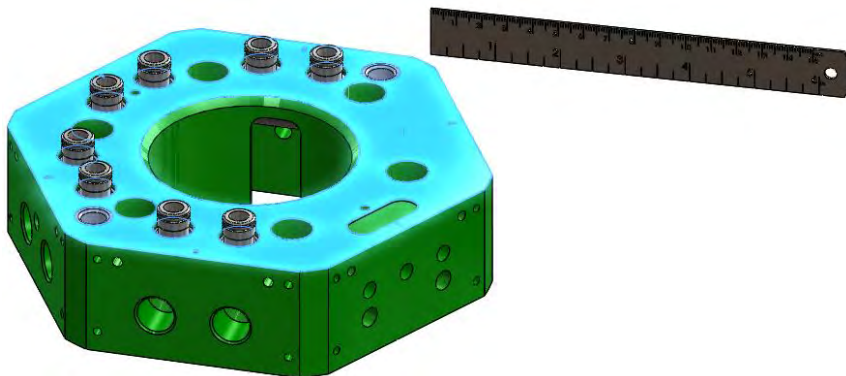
Tool Adaptor – Raised Material Inspection
